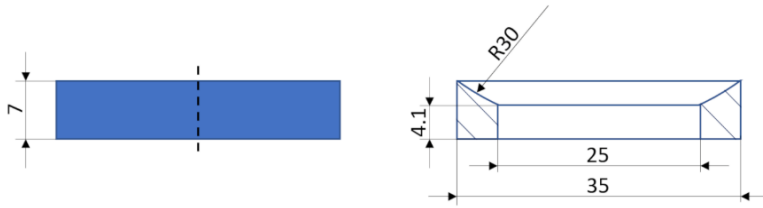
Dimensions (in mm) of the ring specimens in the swollen condition as full part (left) and sectional view (right).
